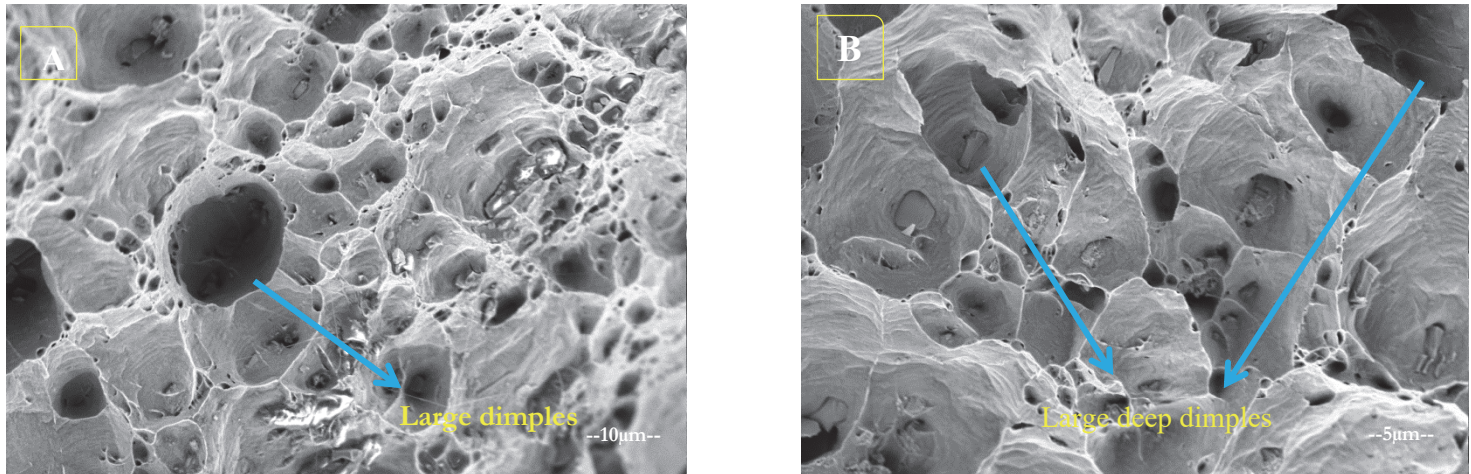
Fracture surface of Sample 9 (800 rpm, 35 mm/min) showing (a) Fully ductile dimpled rupture morphology (b) Large deep dimples indicating excellent ductility.
